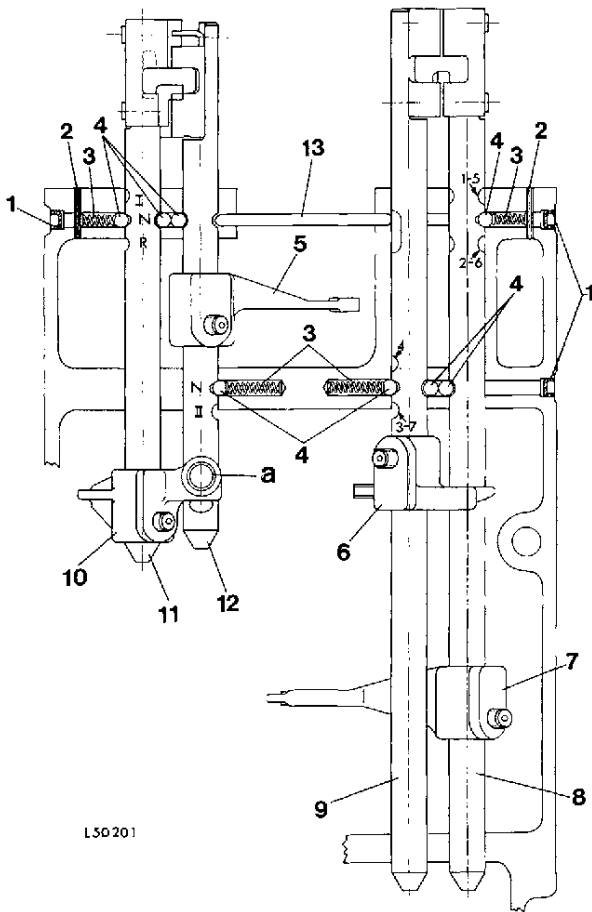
Shift Mechanism for 8-Speed Transmission with Blocked 8th. Gear
